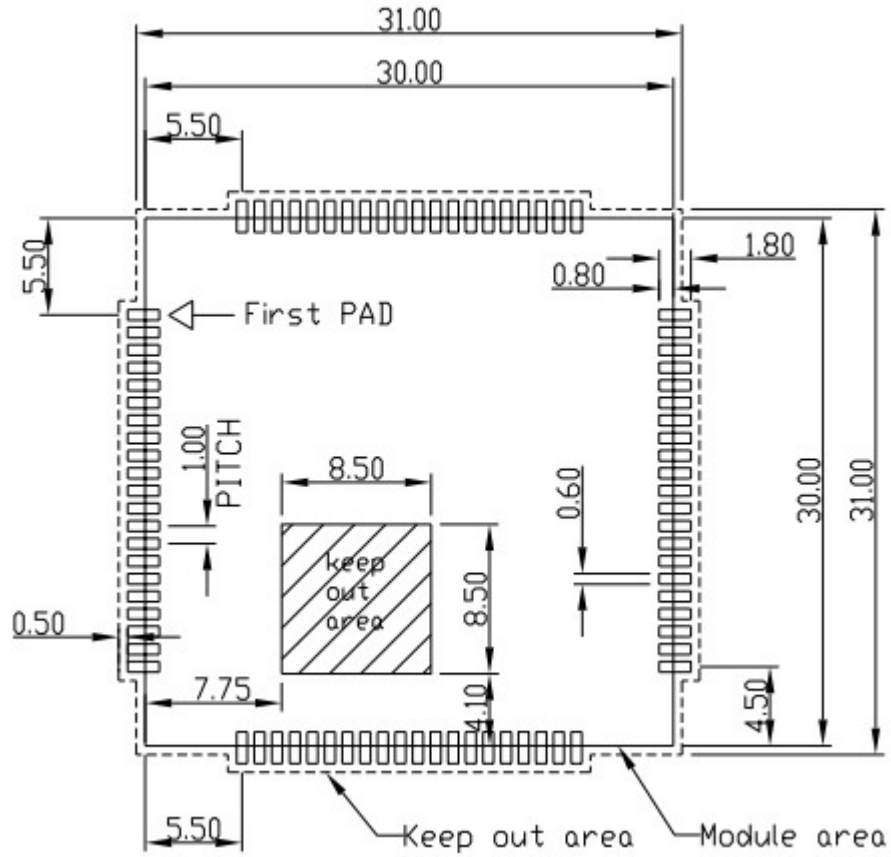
SIM5360 footprint recommendation (Unit: mm)
